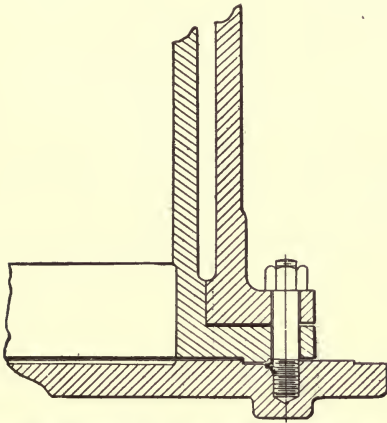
Bottom Cylinder Head with Reynolds Steam Jacket.
